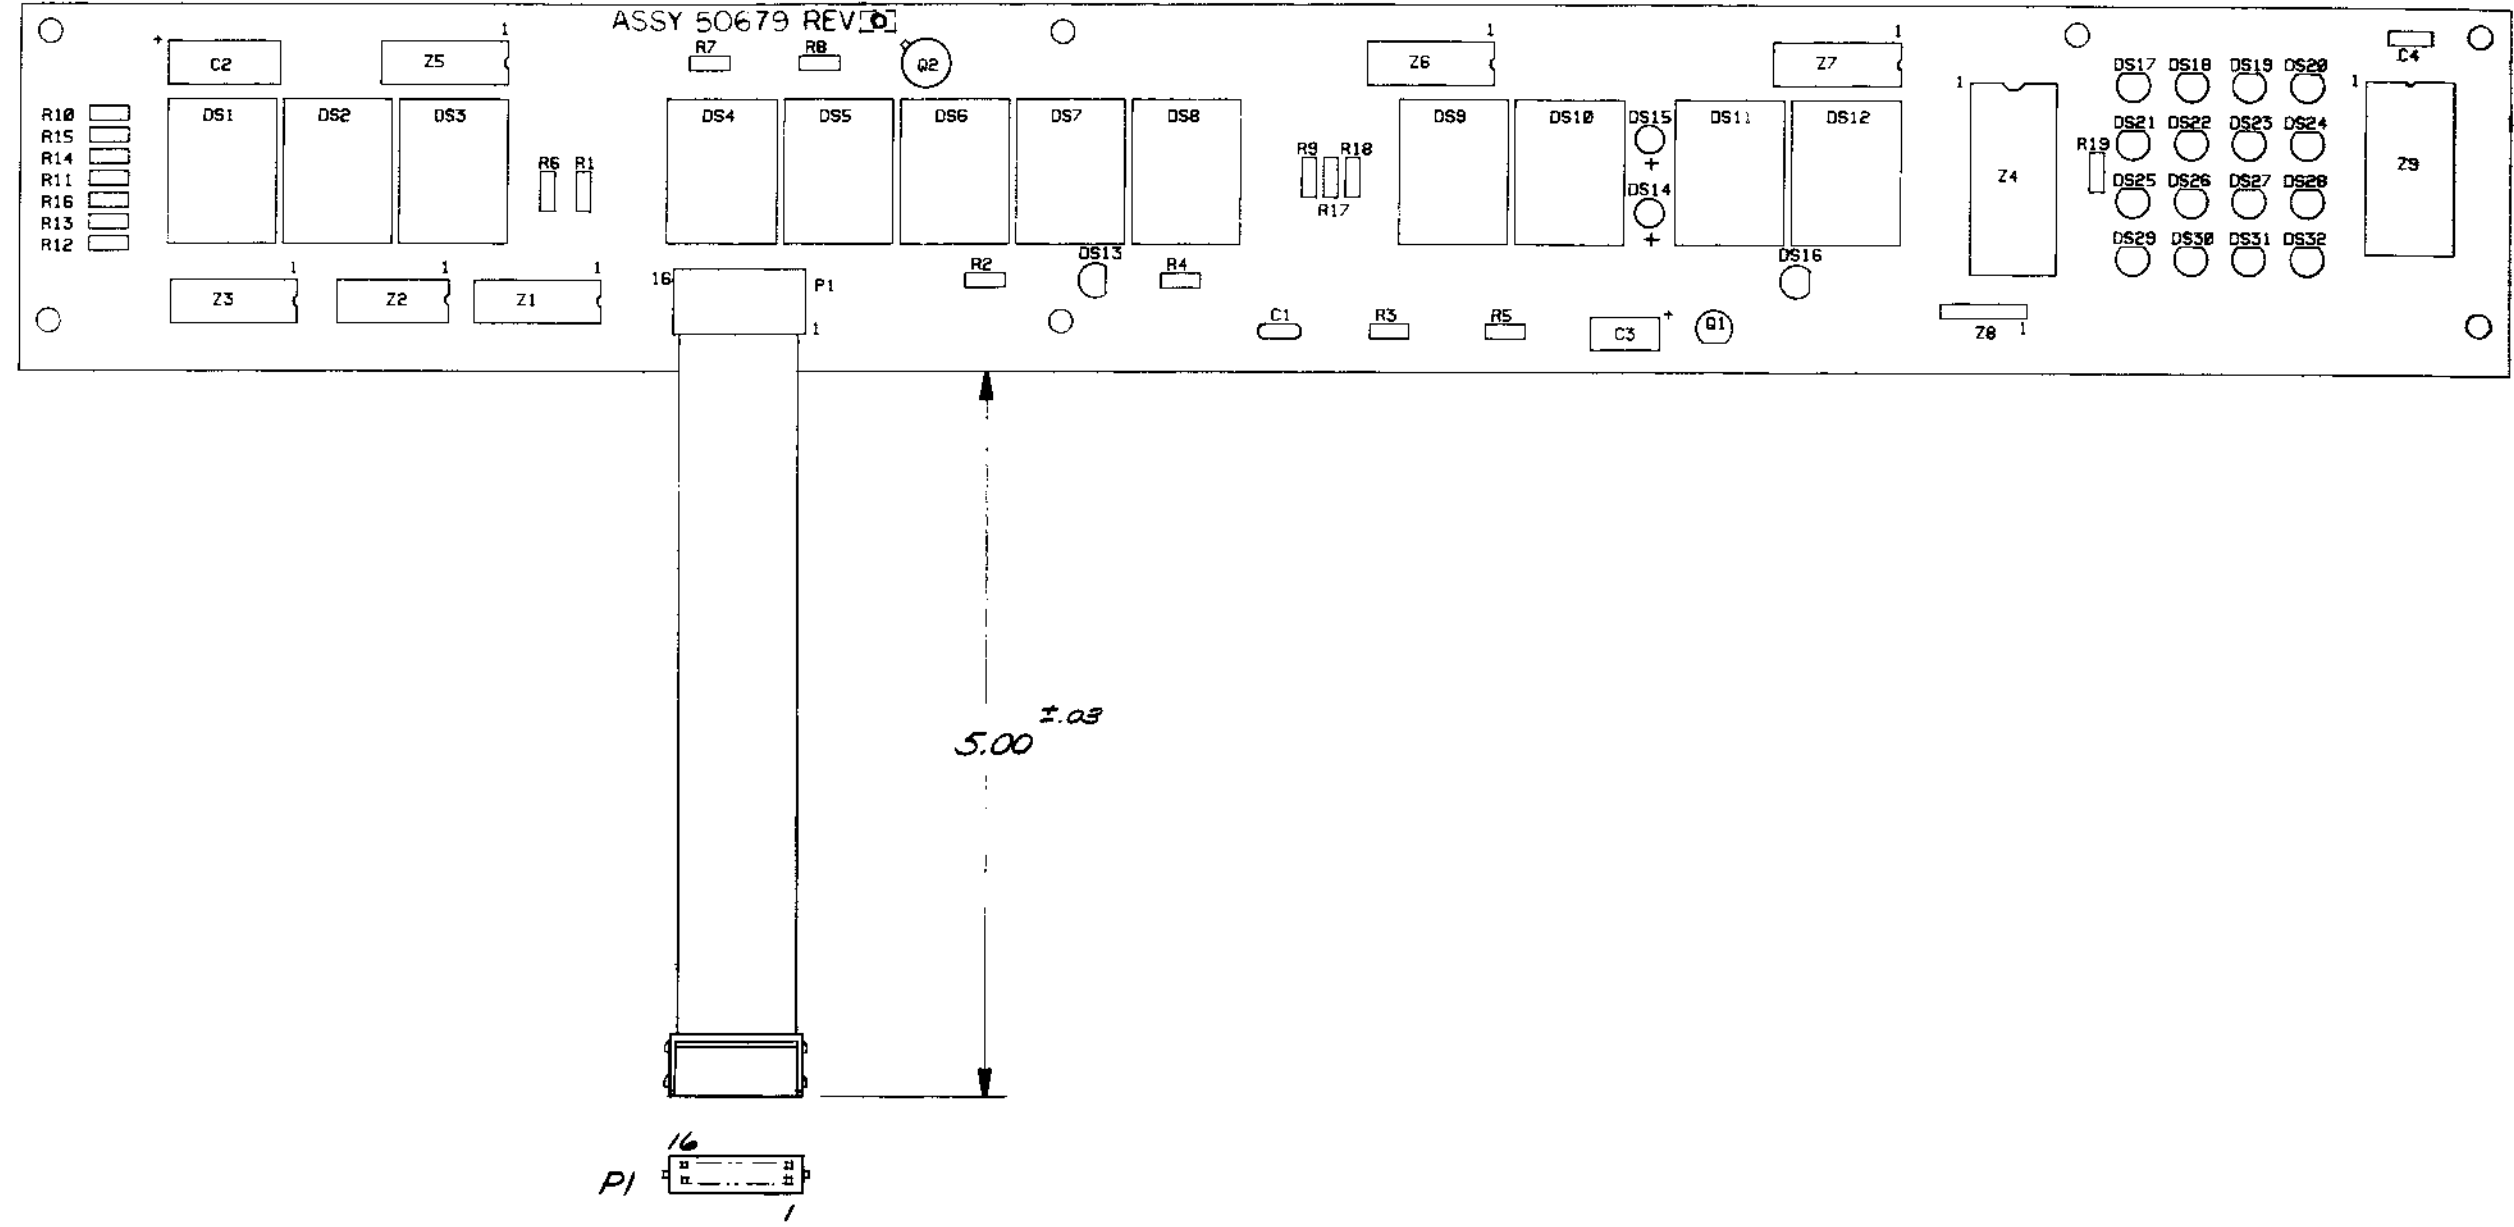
LED Display Printed Circuit Board Component Locations, (50679-0)
